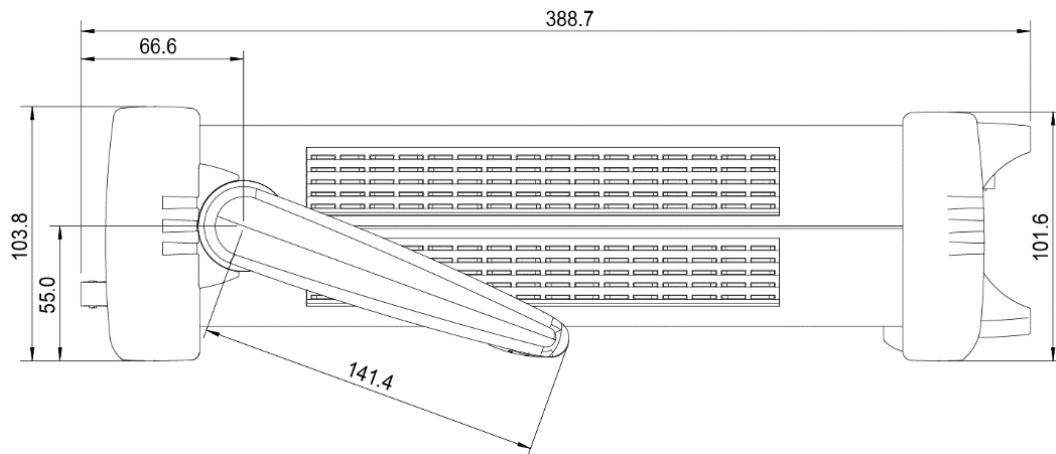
Dimensions (side view, with handle and bumper, in millimeters, nominal)
